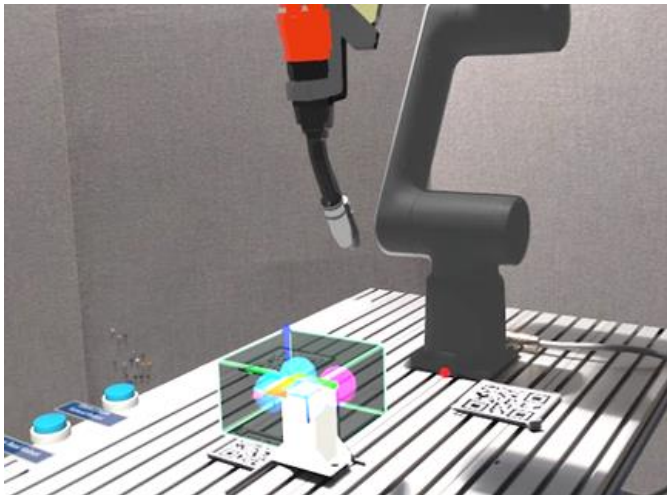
Encapsulation of the targets in a welding piece.
